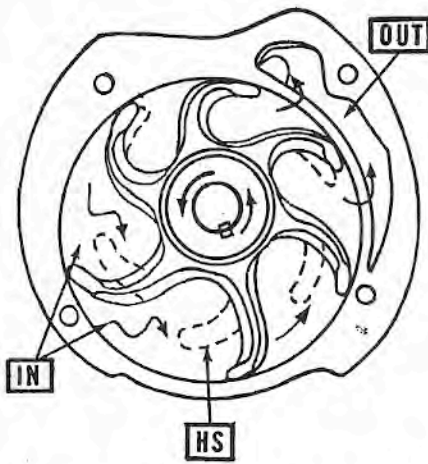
Schematic view of rubber impeller type water pump showing principle of operation. The offset housing and flexing impeller blades causes pump to operate by positive displacement at slow speeds. At high speeds, impeller blades remain curved (HS) and pump operates by centrifugal action.
